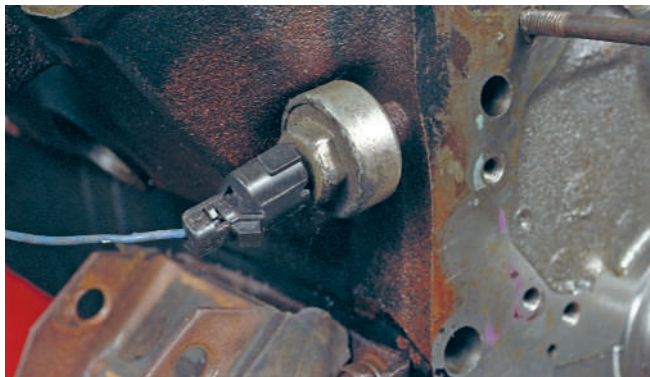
The oil pressure gauge is installed into the oil pressure sending unit's bore in the engine block.
